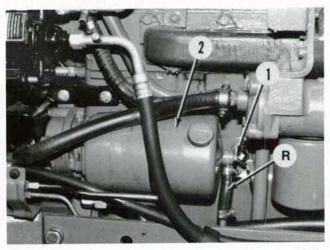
Power steering pump and reservoir assembly is located on left side of engine.
